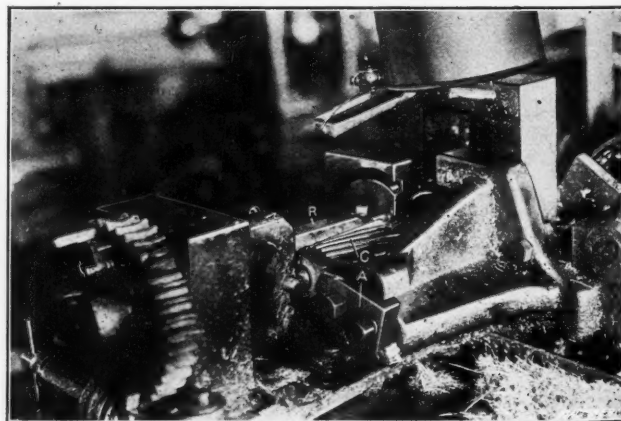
Rotating Fixture used for milling Round Bottoms of Receivers
